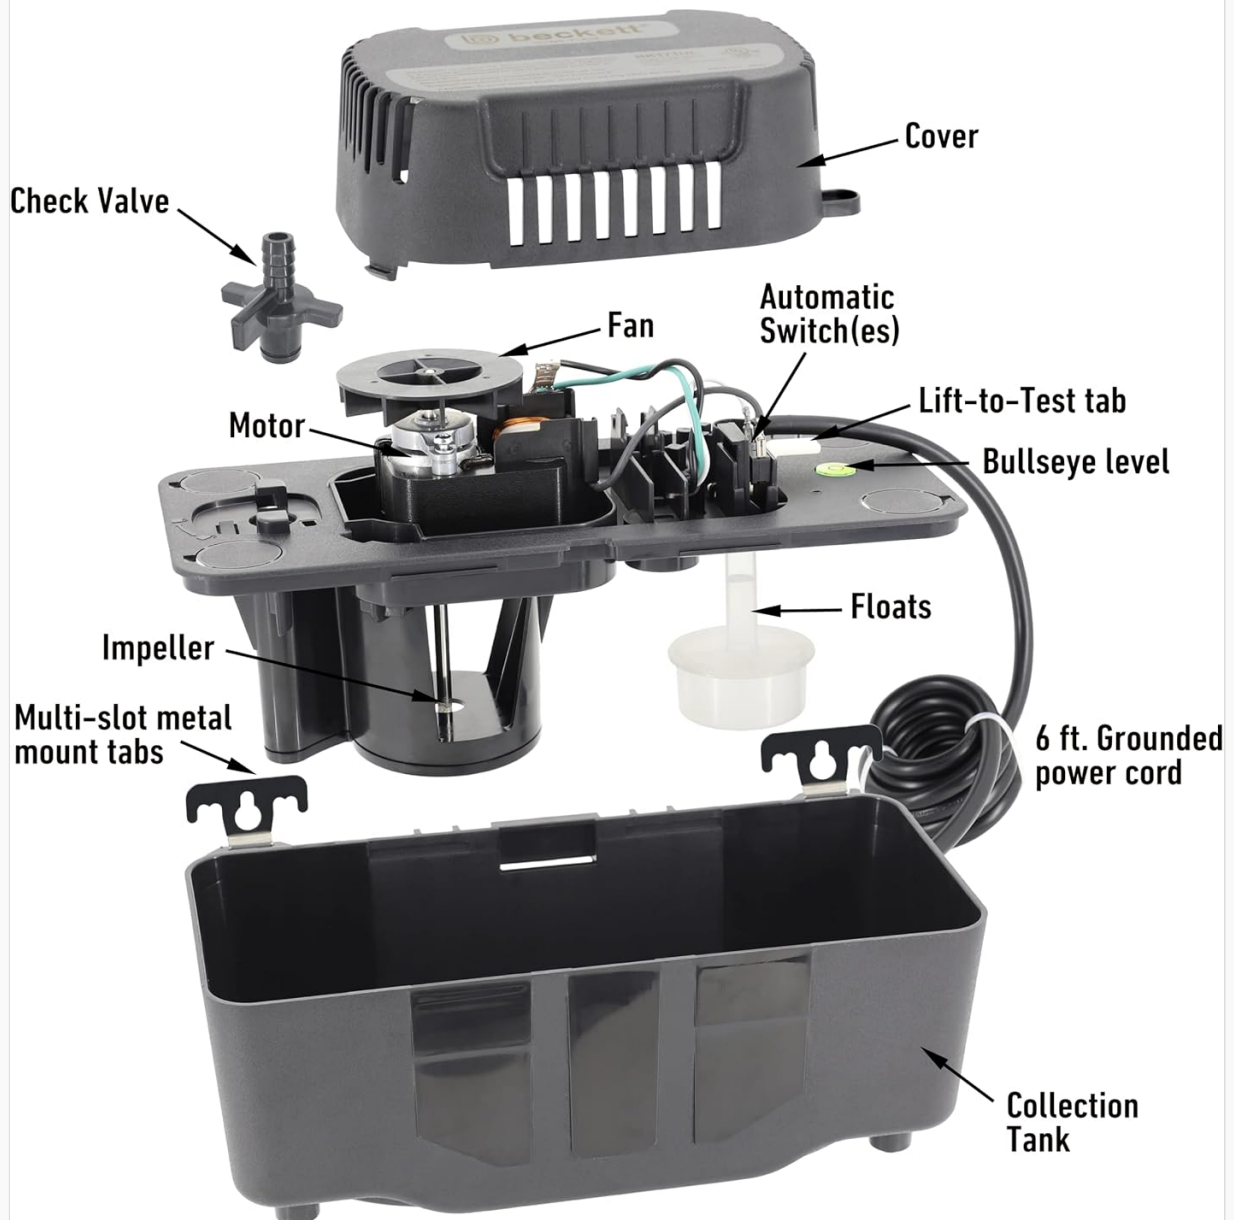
Exploded view showing pump components including cover, check valve, motor, fan, automatic switches, lift-to-test tab, bullseye level, floats, impeller, multi-slot metal mount tabs, 6 ft. grounded power cord, and collection tank.
